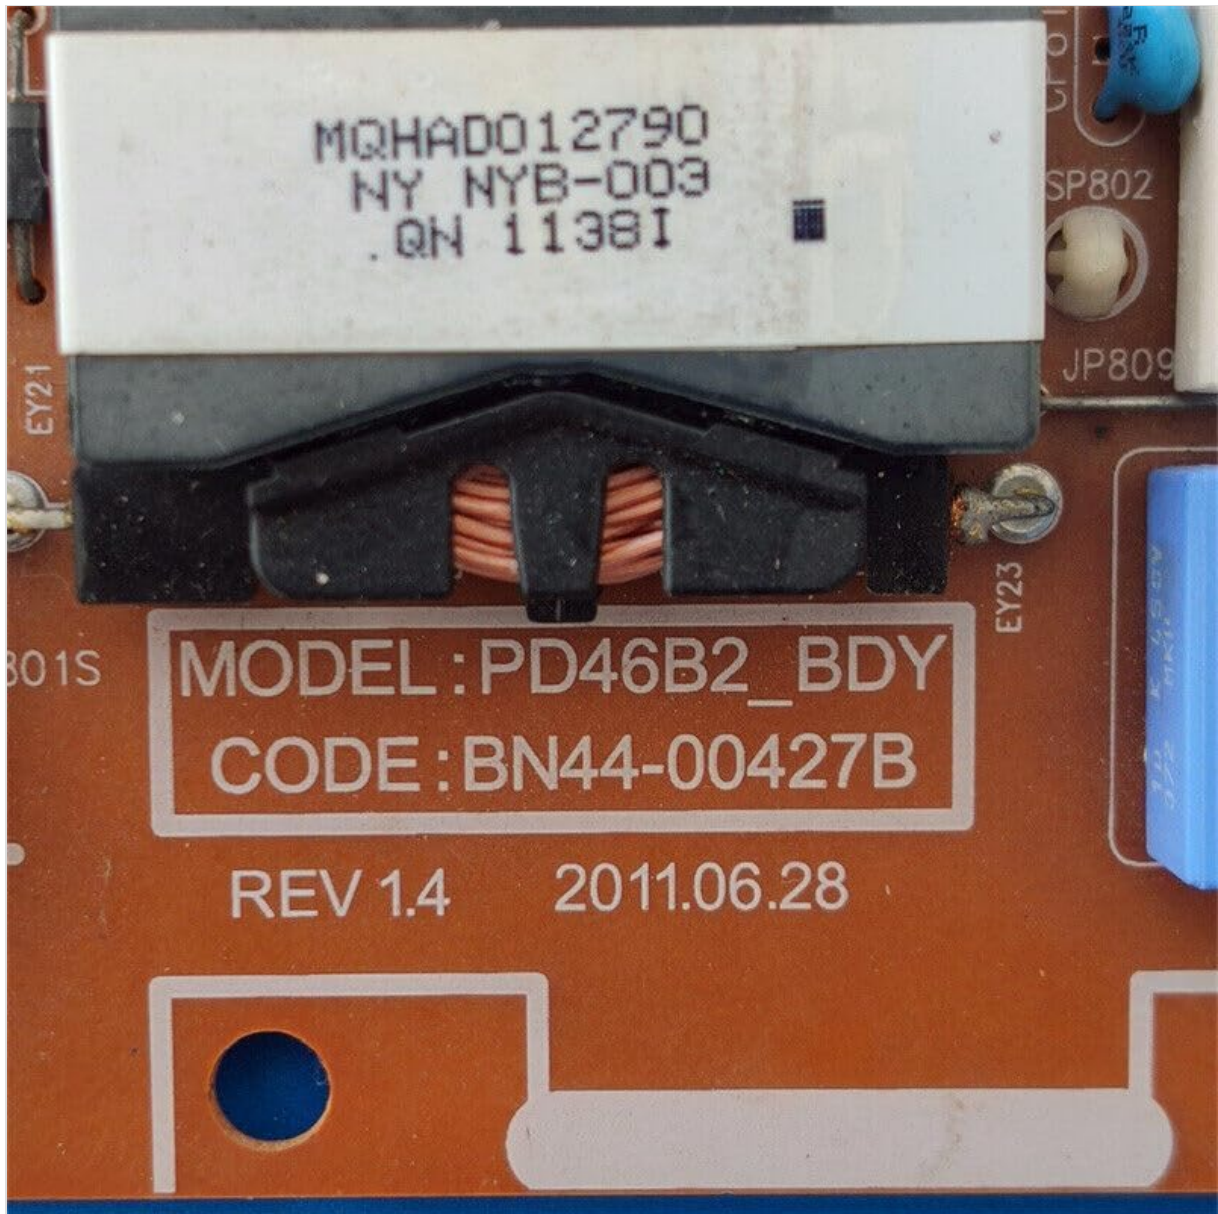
A close-up view of the power supply board, highlighting the label with "MODEL: PD46B2_BDY" and "CODE: BN44-00427B REV 1.4 2011.06.28". This label is crucial for verifying the correct board model.
